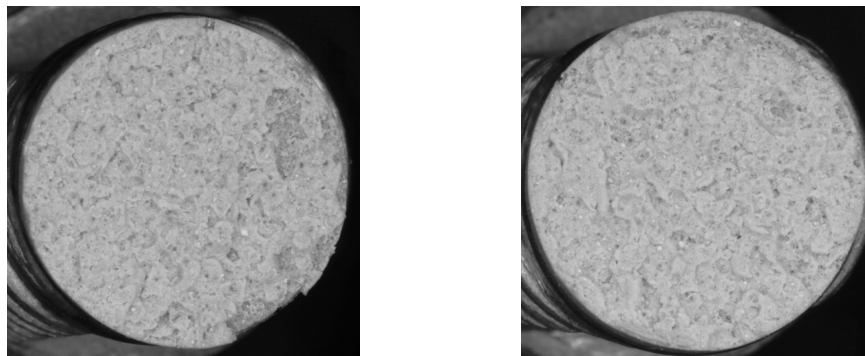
Fracture surface of a representative butt joint specimen.
